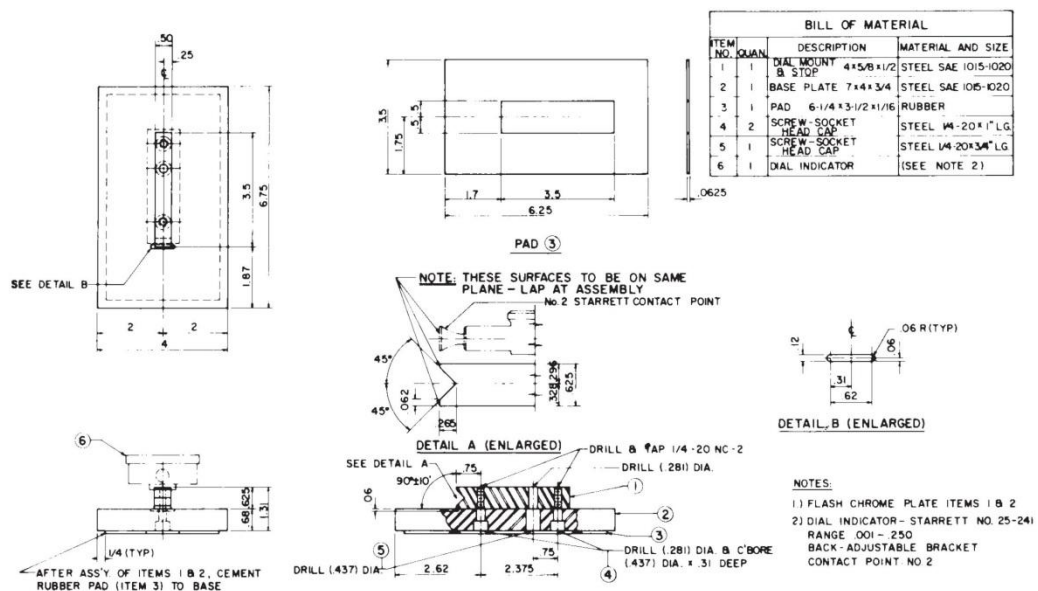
Assembly and Details for Lateral Expansion Gauge
